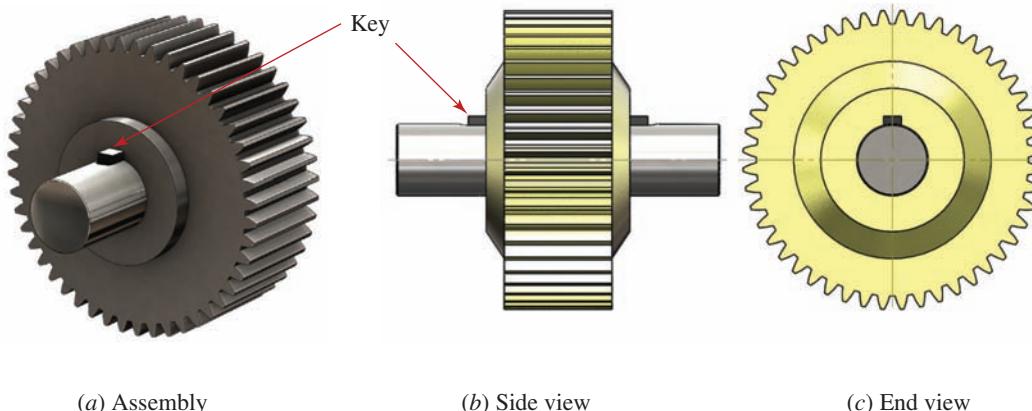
Gear, shaft, and key for Problem 11-1
